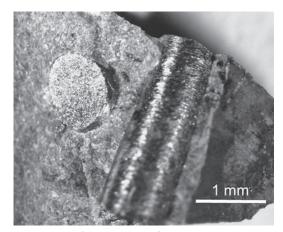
Detail of the building of tungsten bars into a titanium matrix
